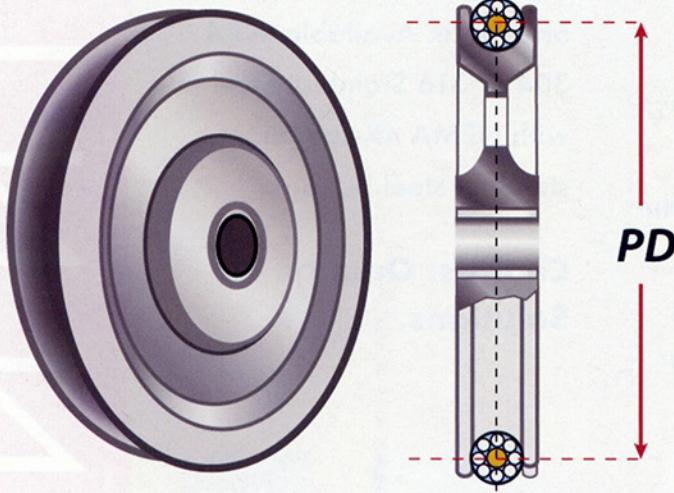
The layout of a typical single groove of an elevator sheave (PD = pitch diameter)
